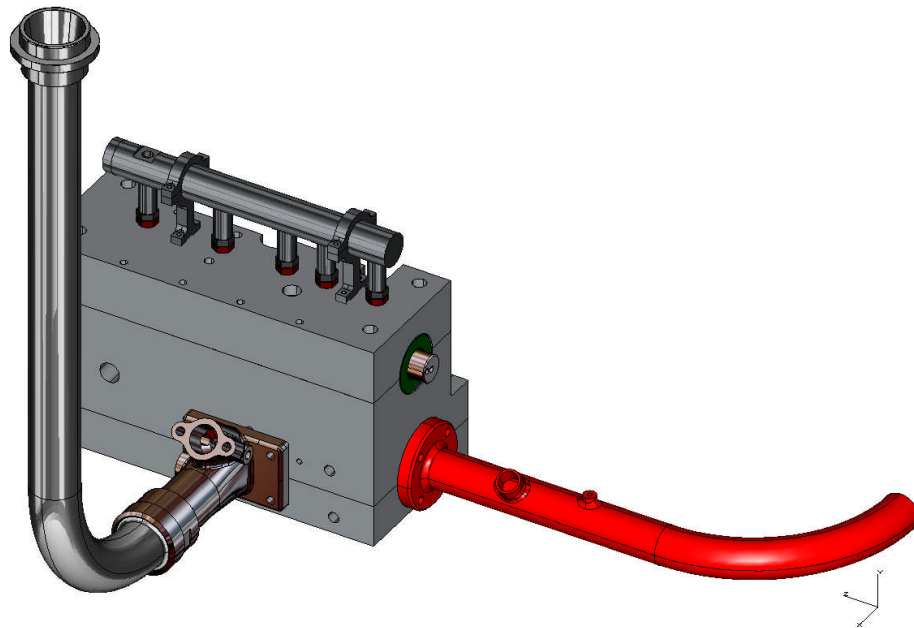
Cylinder head with inlet and exhaust manifolds attached
